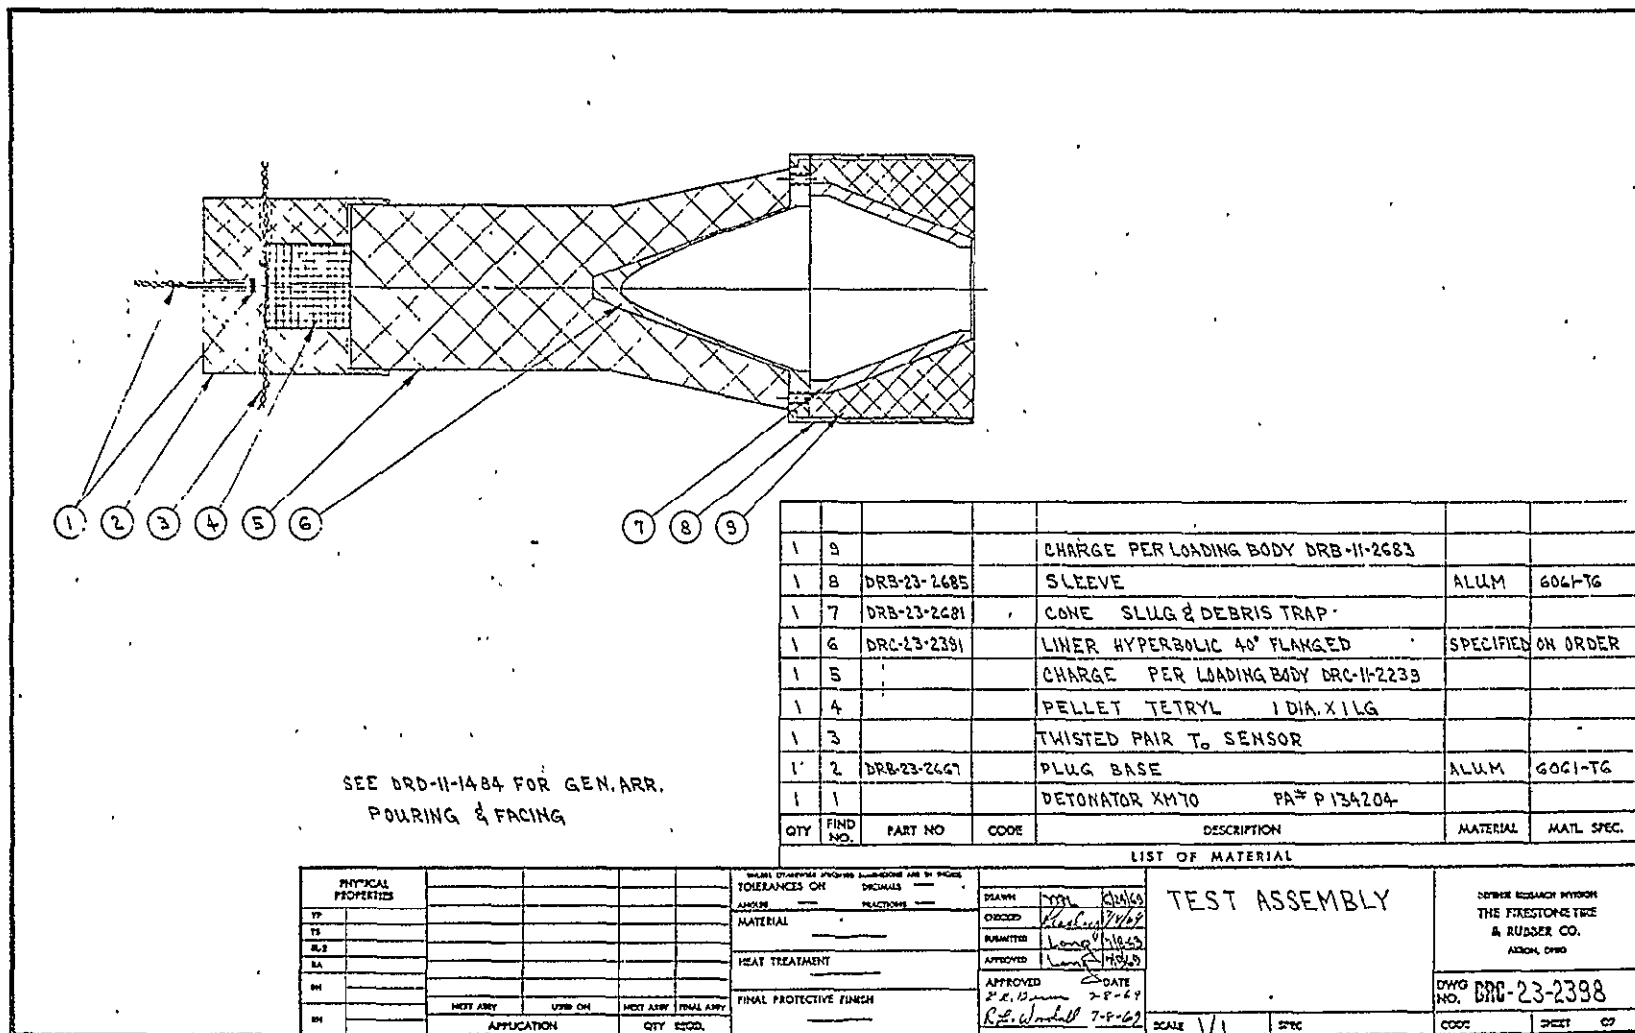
40° hyperbolic test assembly w/1-in. aperture slug and debris trap.
